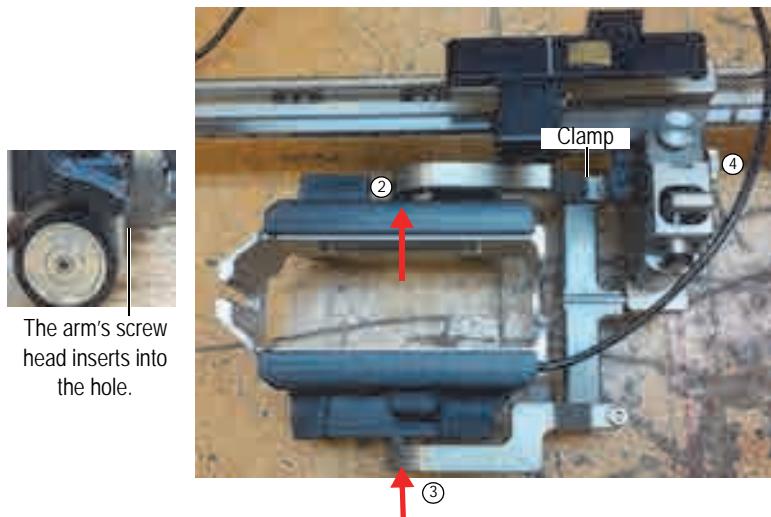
The MagnaFORM held on the scanner with mounting arms
